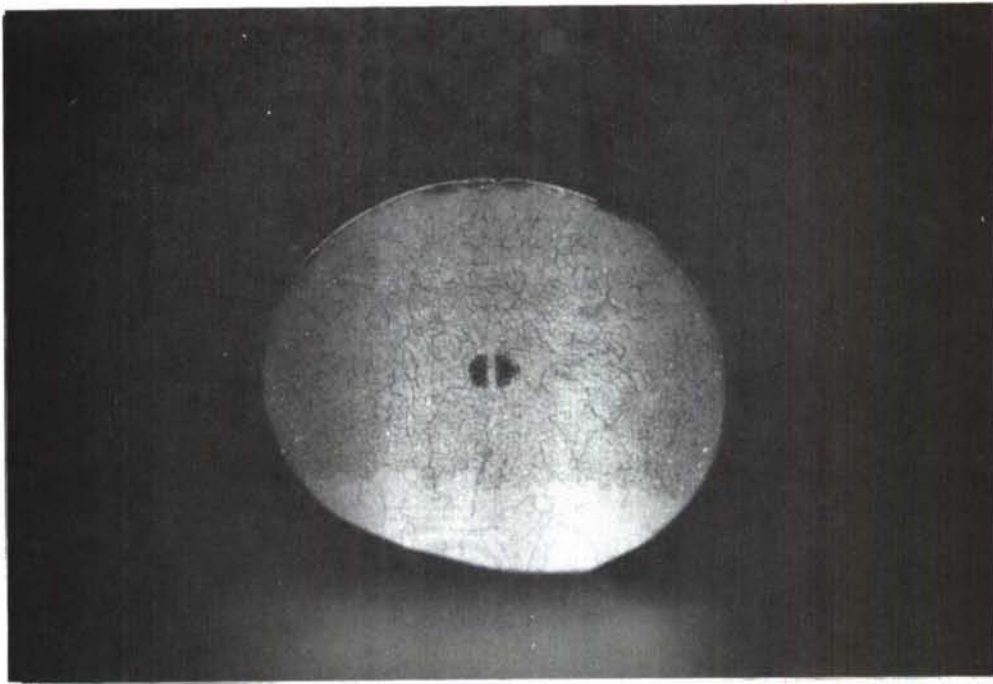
An image of a 0.05 inch long fatigue crack emanating from a 0.19 inch diameter hole in a sheet of aluminum 0.045 inches thick.
